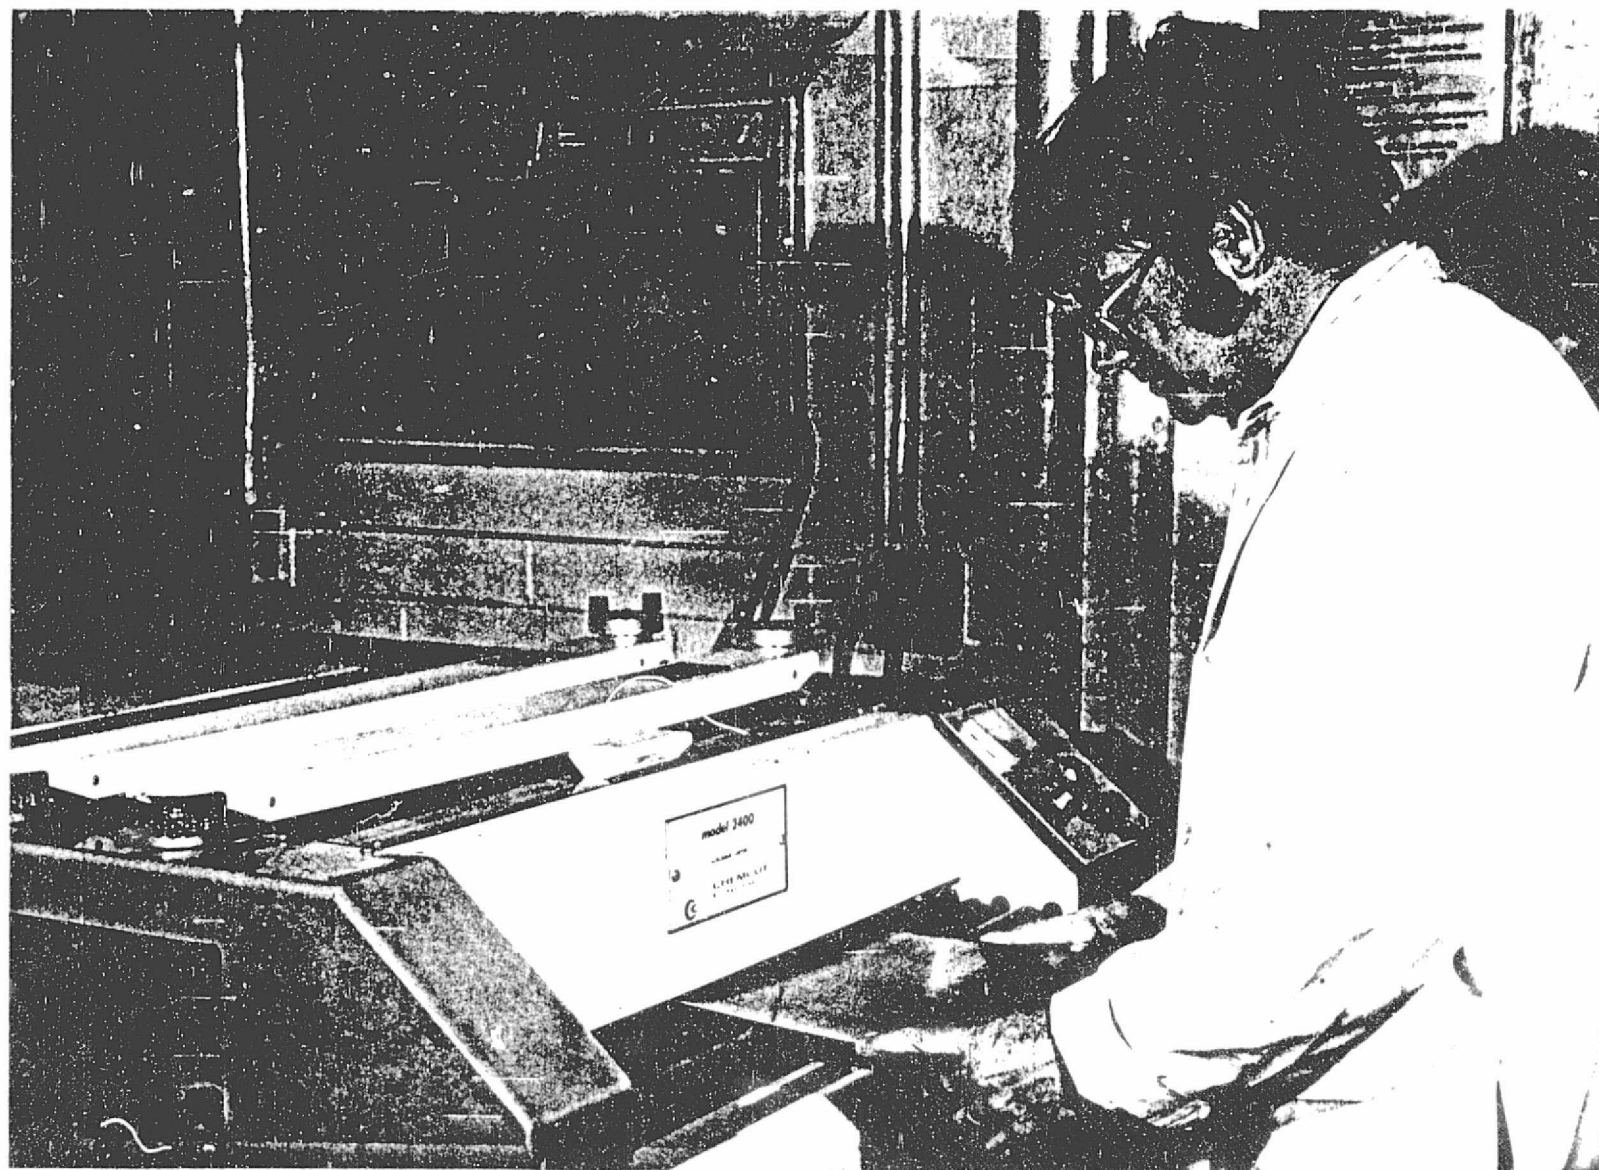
The laminates are cleaned with the scrubber-deburring machine.
